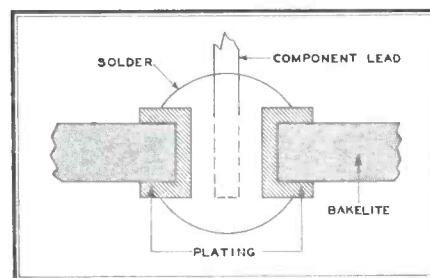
HOW TYPICAL SOLDERED JOINT APPEARS
